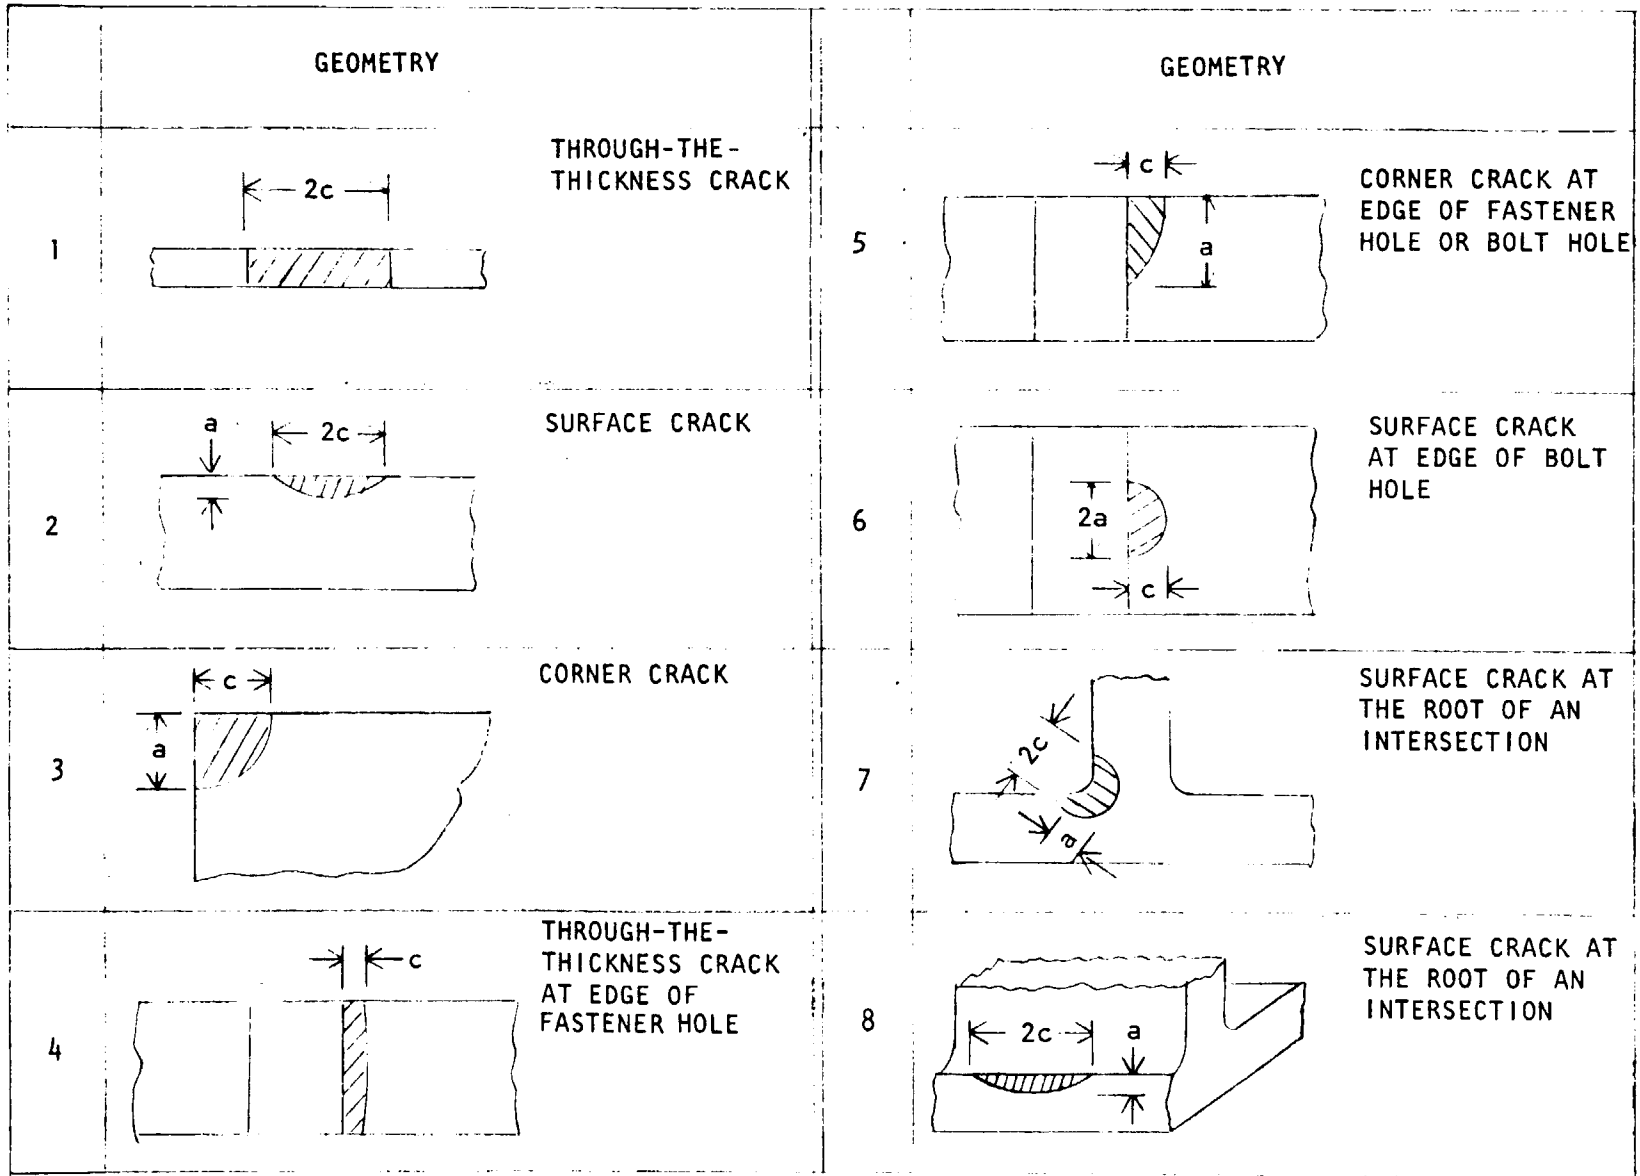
Cross-Sectional Views of Common Crack Geometries
